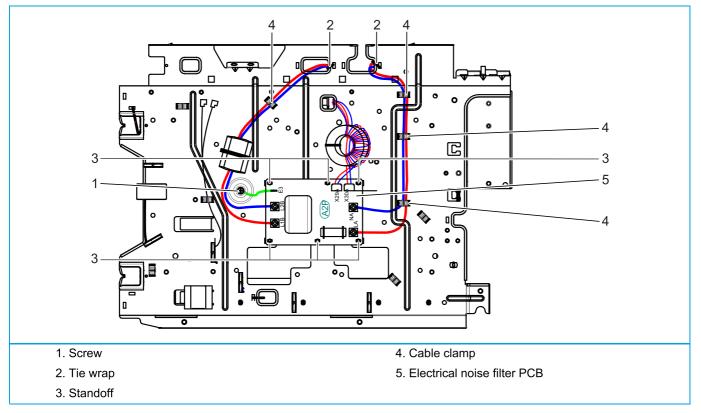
Stripping the main PCB assembly 1-phase (rear) for RZAG71+100N
